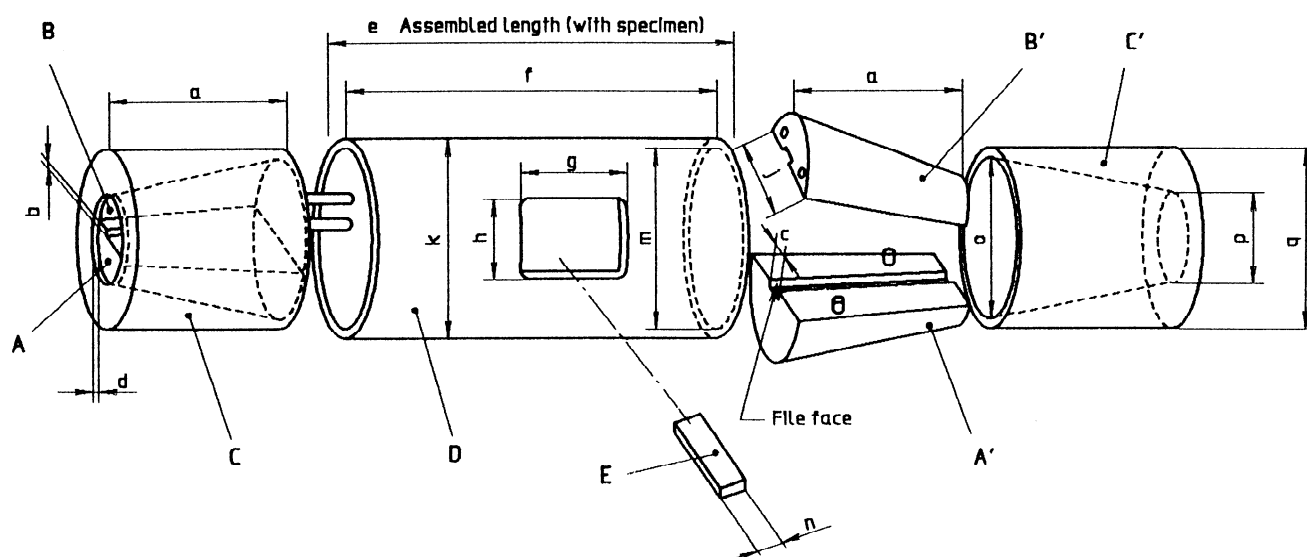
Exploded view of compression fixture for method A (for dimensions see table 1)
